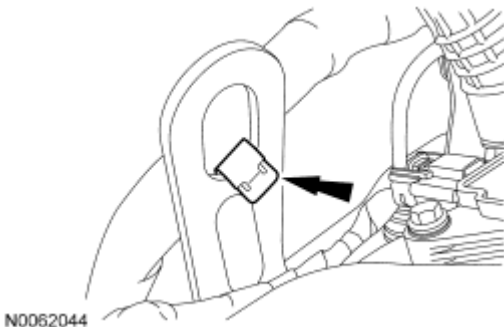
Locating PSP Hose Retainer From Engine Lifting Eye
